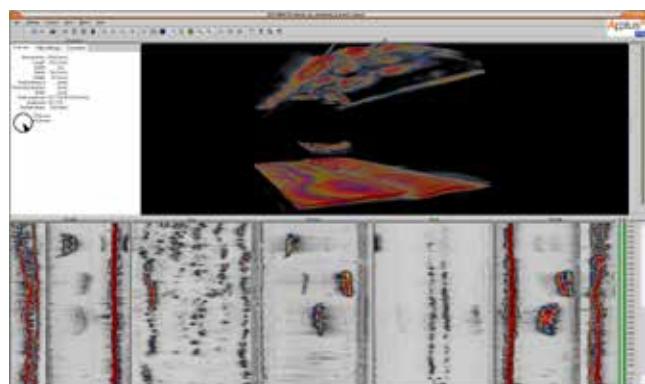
Example of an IWEX scan from a girth weld with small and larger imperfections. The upper part of the display shows a 3D presentation of a selected area of the weld. The lower part displays the projection views.
